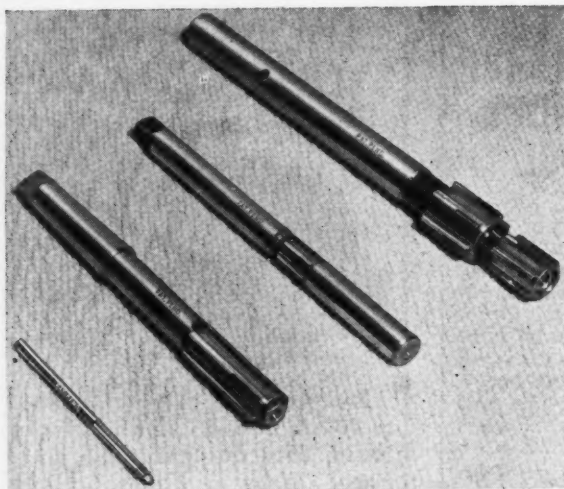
(First tool at left) Staples-Type Straight Shank 0.250-In. Expansion Machine Reamer. (Second) Standard Staples-Type Machine Reamer. (Third) Staples Alignment Type Line Reamer. (Fourth) Staples Double Cutter Shell Type Reamer.
